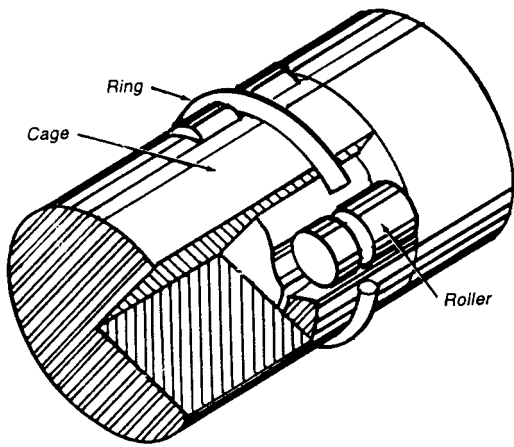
The ring resists the natural tendency of the rollers to jump out of the grooves in the reduced end of one shaft. The slotted end of the hollow shaft acts as a cage.
